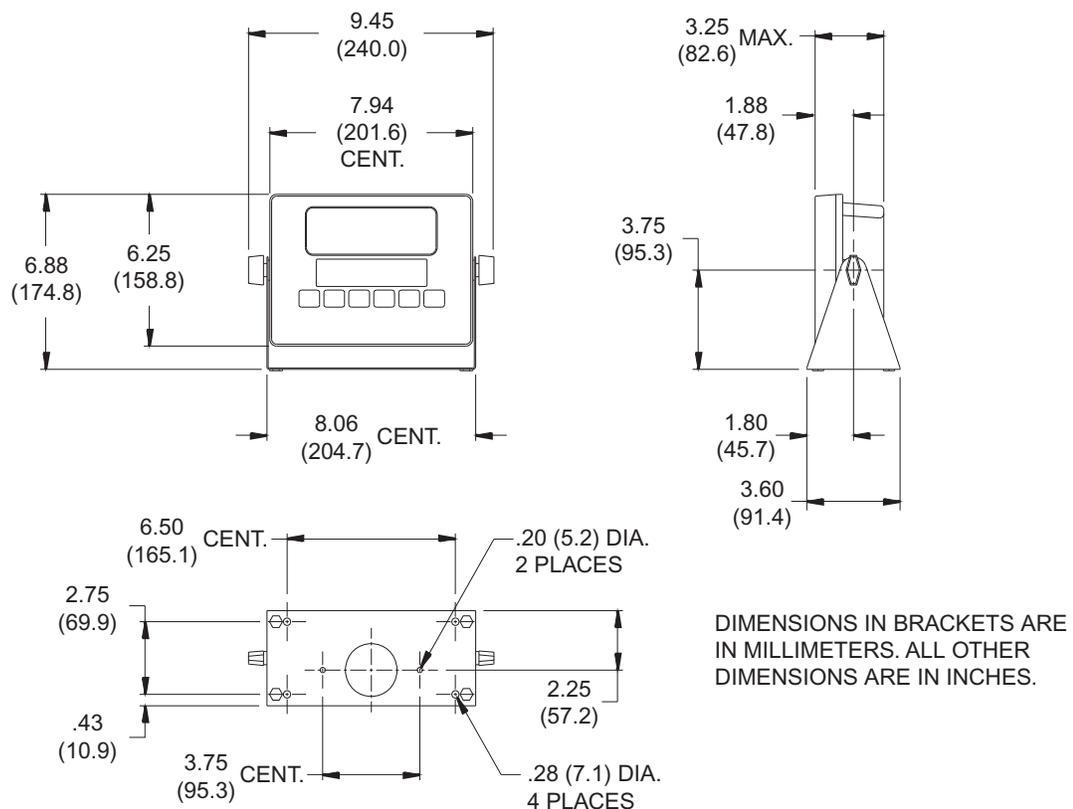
Mounting Dimensions of Digital Weight Indicator
